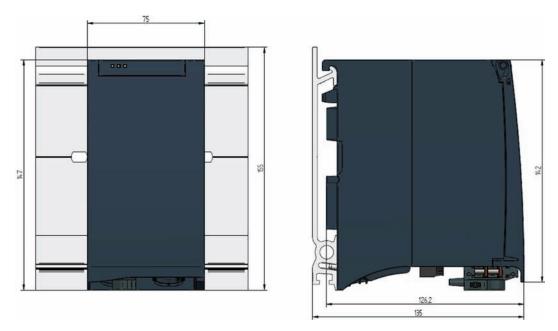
Dimension drawing of the PM 190 W 120/230 VAC load power supply module
